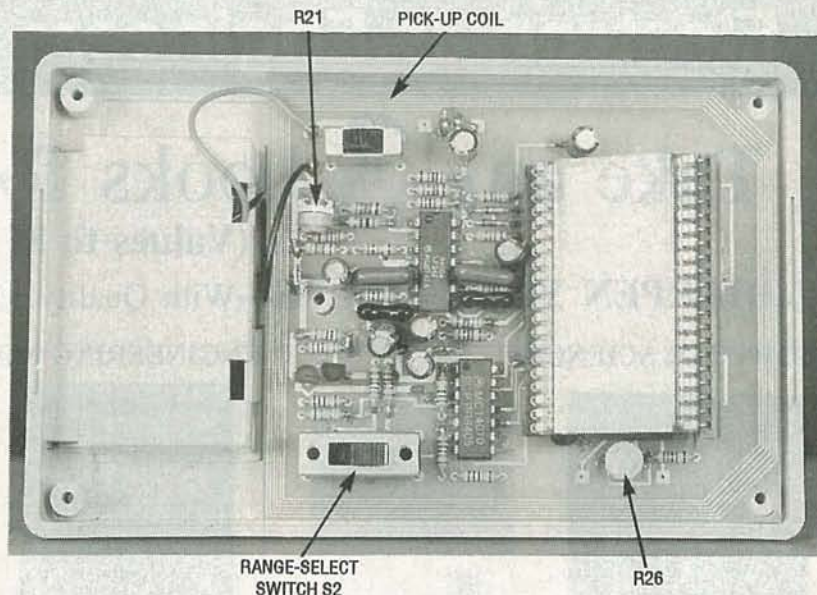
THIS IS AN INTERNAL VIEW of the magnetic field meter. Assembly is easy, just install all components below the LCD first.
